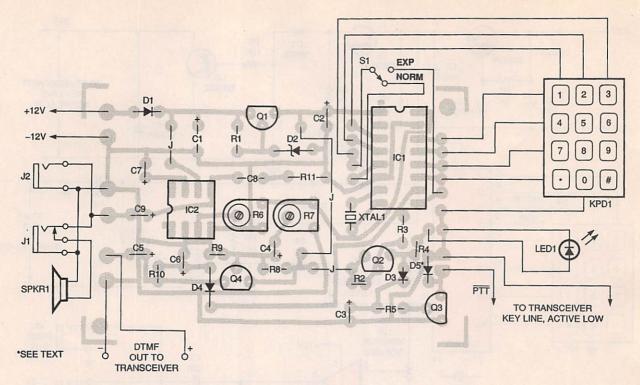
If you're using a PC board to build the Tone Pad, this parts-placement diagram should make assembly easy.
